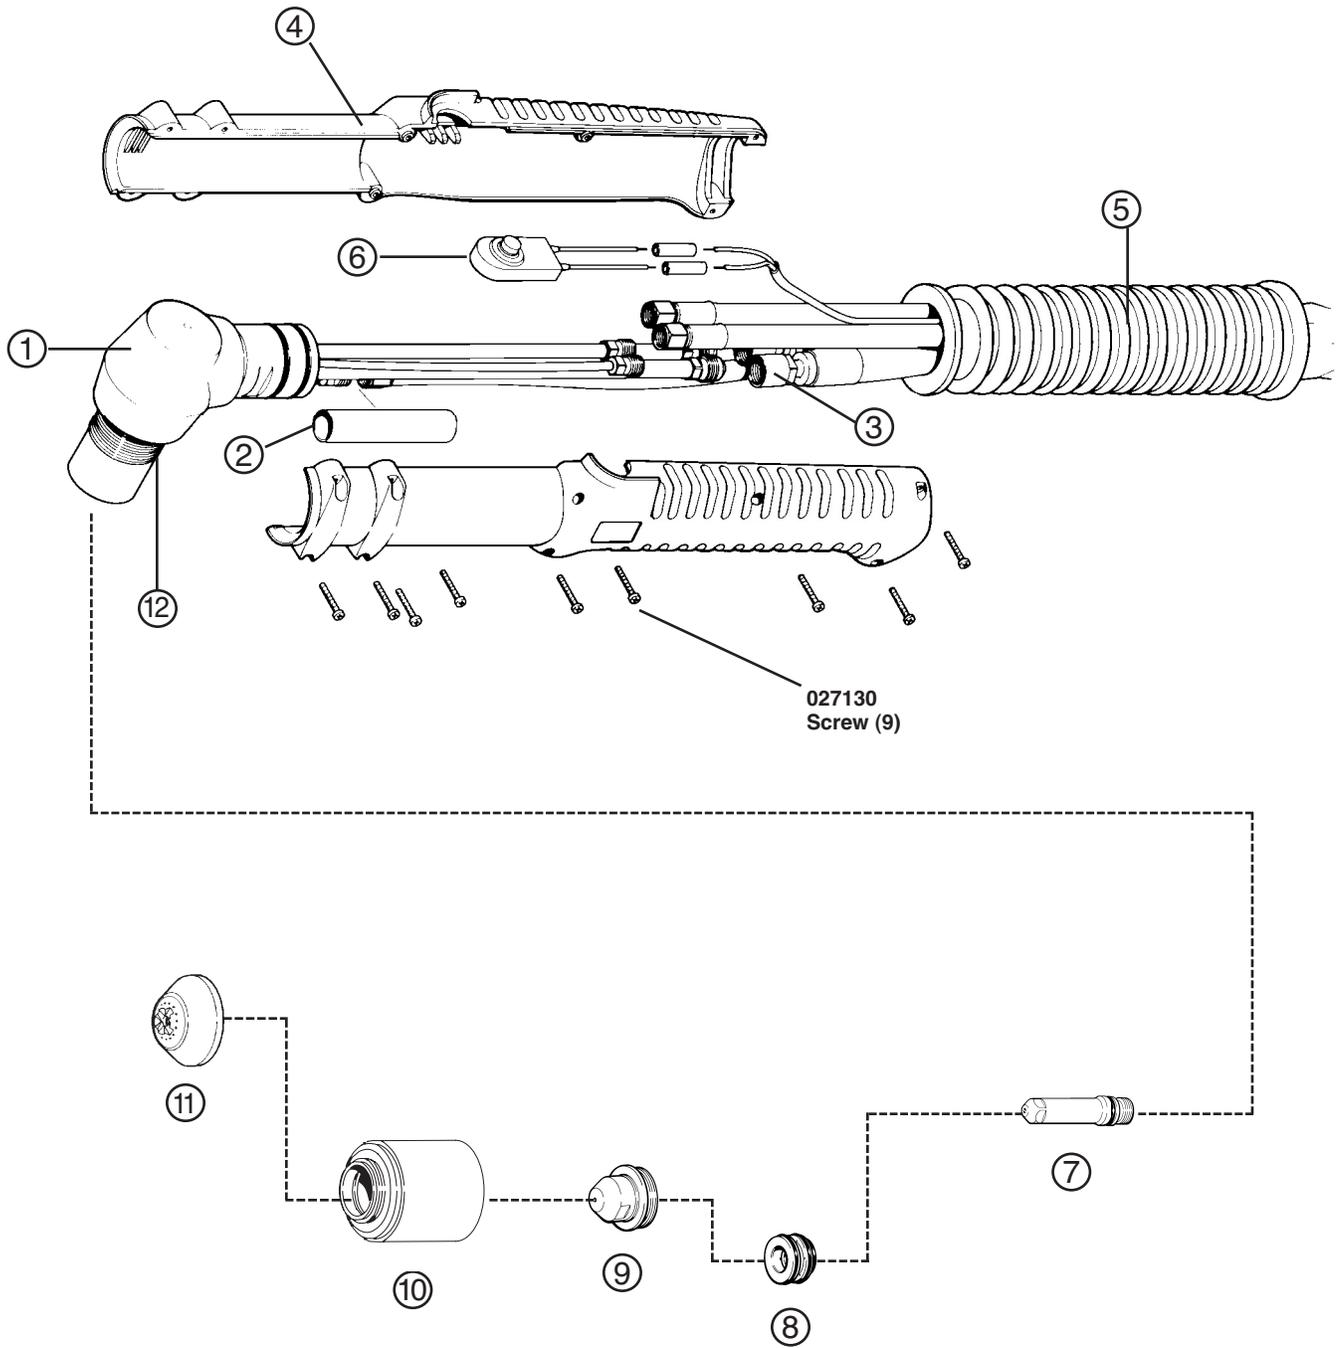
MAX200 Rev 1 Hand Torch Assembly
